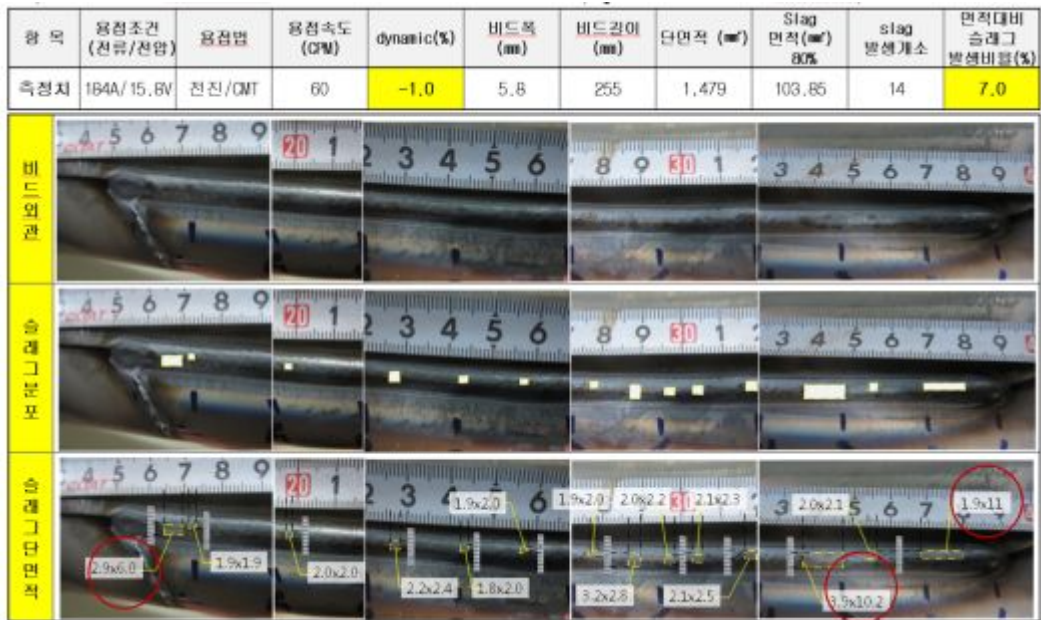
Dynamic-1.0% Progressive welding
